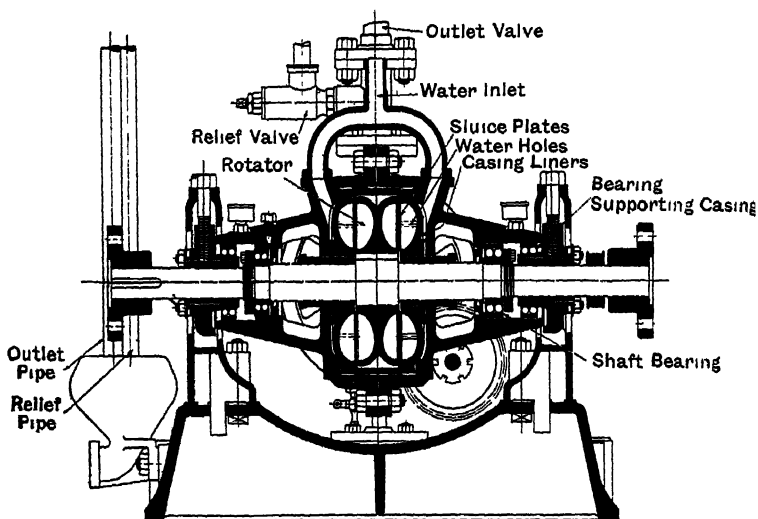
SECTION OF FROUDE HYDRAULIC DYNAMOMETER
